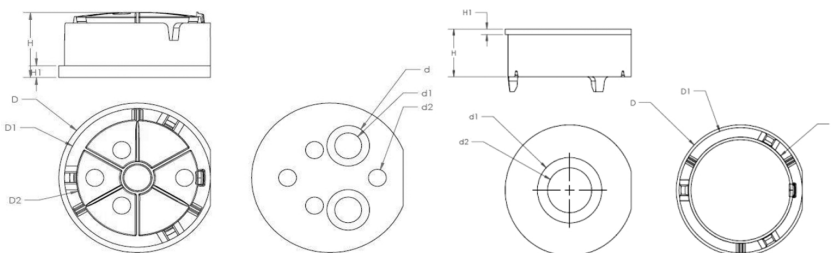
Schematic draw of the dimensions measured in case of punch and die.
